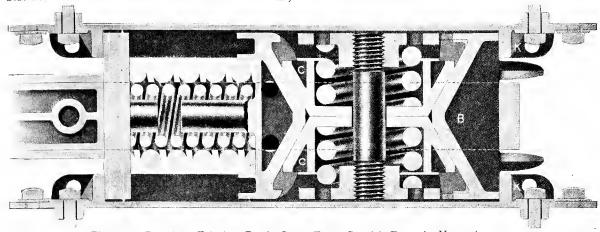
Republic Friction Draft Gear, Type G, with Parts in Normal Position. Western Railway Equipment Company.
